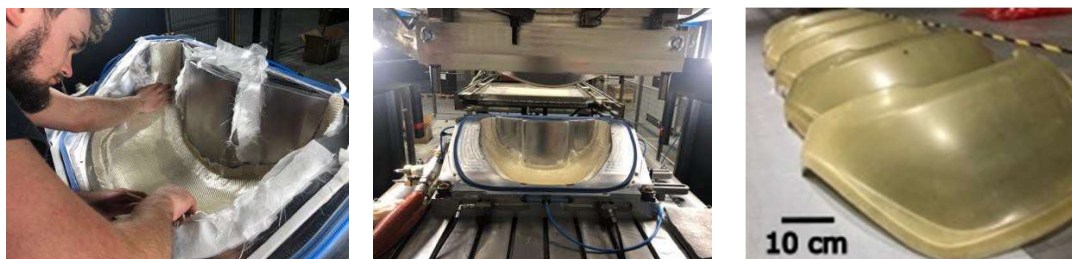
Process of making front bumper in double-sided heated mold in vacuum-assisted hydraulic press, from left: laying prepreg, placing mold on press, final parts.
